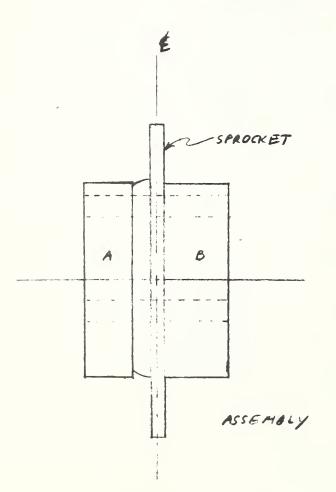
FIGURE A-Z CHAIN TEST SPROCKET SMACER Z REG'D NAT'L STEEL
